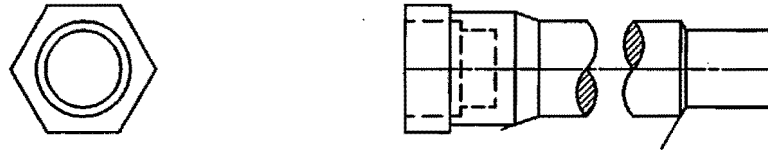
Completed Adjusted Screw Drawing without Dimensioning
